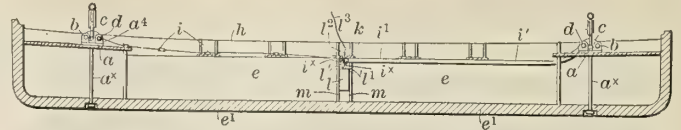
Longitudinal Section of a Ship's Boat to Which Disengaging Gear Is Applied
